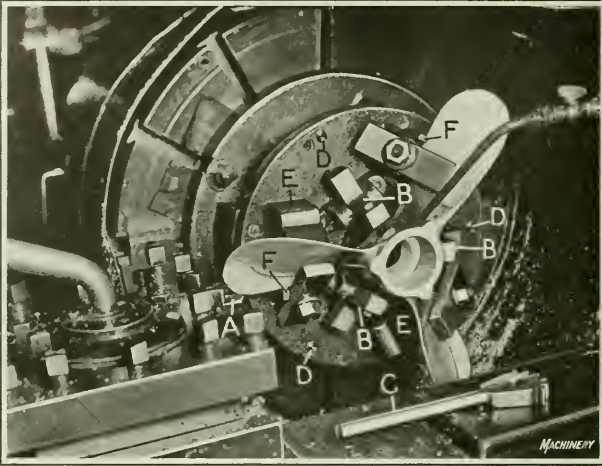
Turret Lathe equipped with Special Fixture for chucking Motor Fan
